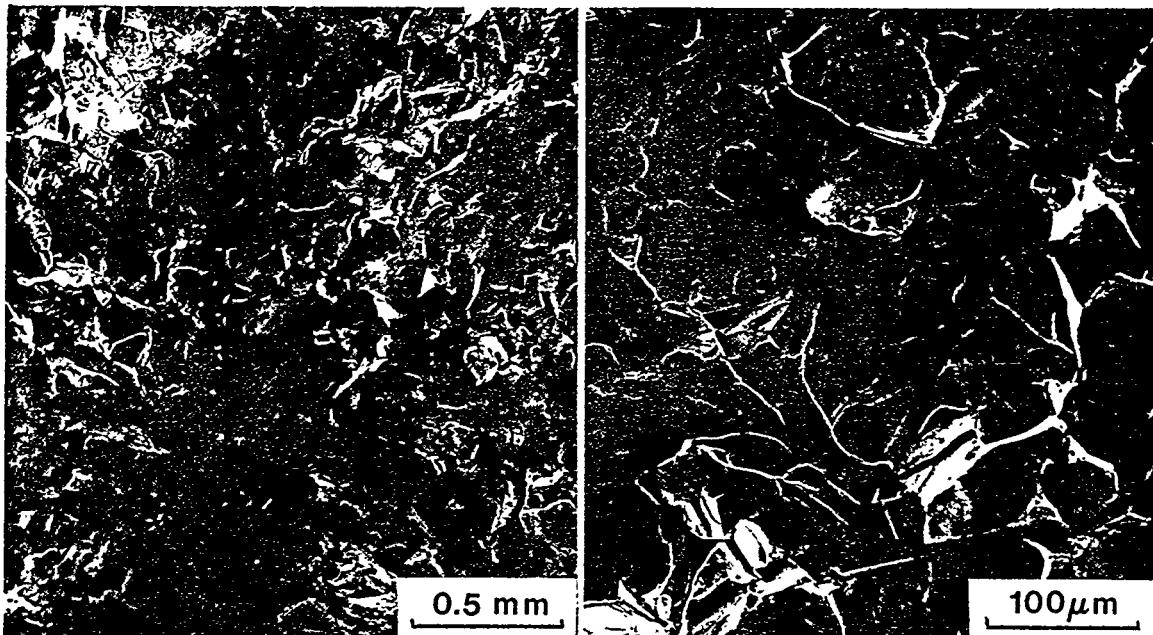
Fractography for second heat of FAP-Y. Left: low magnification view of Charpy specimen tested at 150°C. Note the many particles on the fracture surface. Right: higher magnification showing cleavage fracture.
